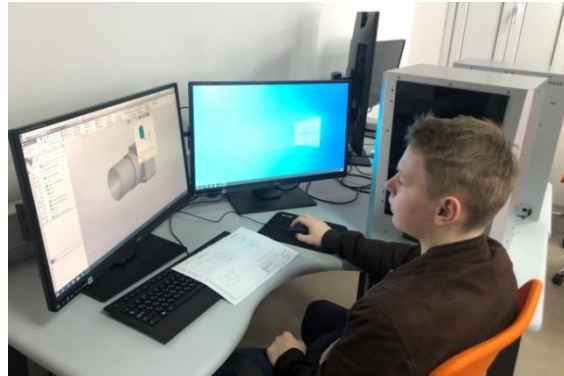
The general view of the workplace of the participant in the demo exam for the "Mechanical Engineering CAD" skill.
